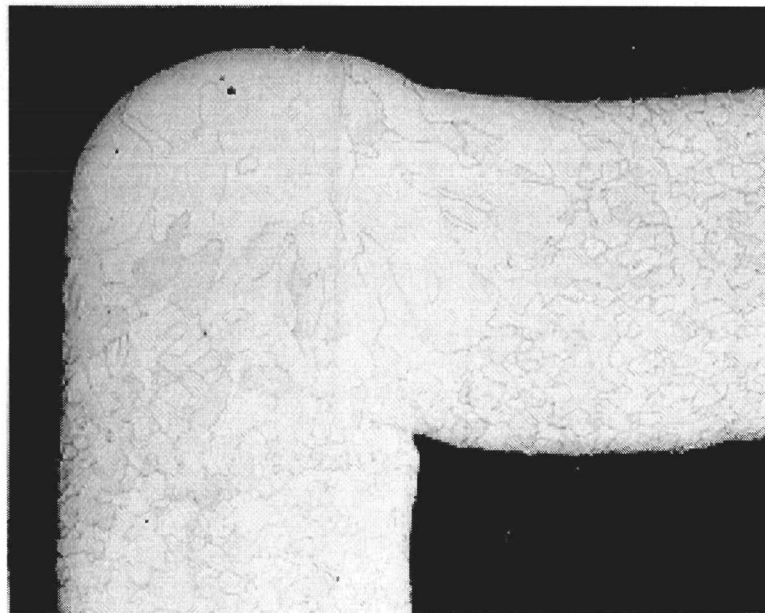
Closure weld section of RS-3, as etched, 50X.
